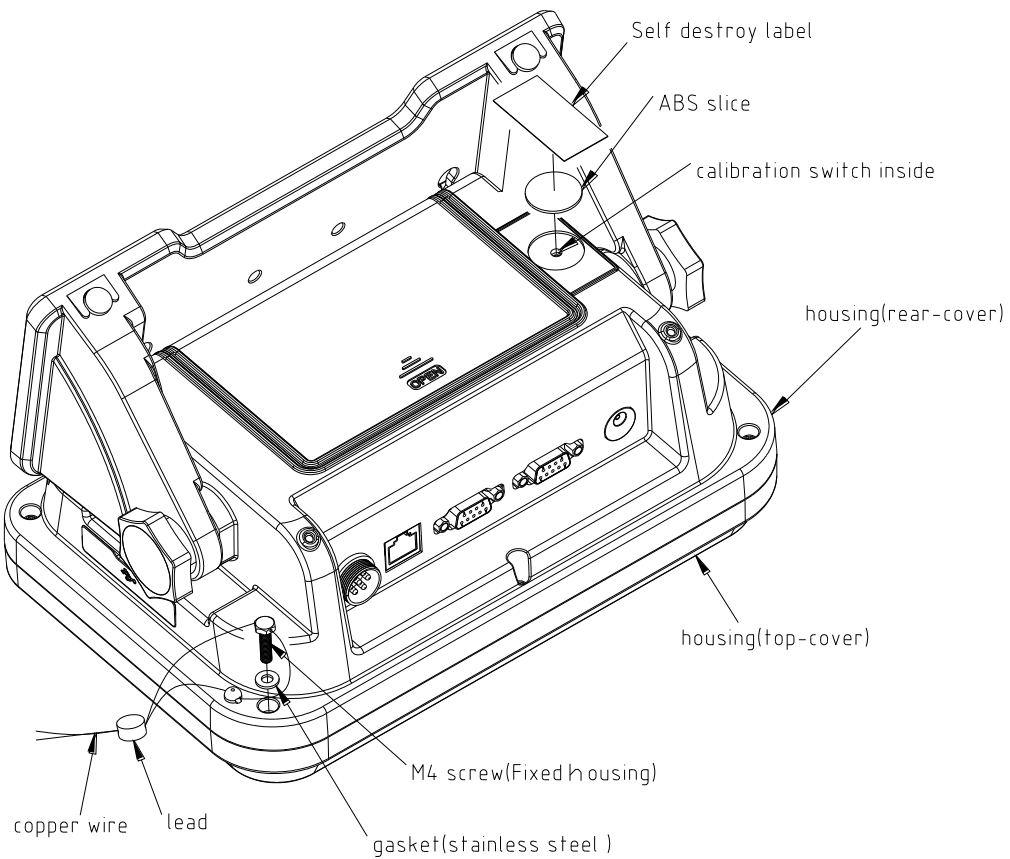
Sealing of T7-20 / T7-40 / T7-50 / T7-60 indicators with wire and seal.
